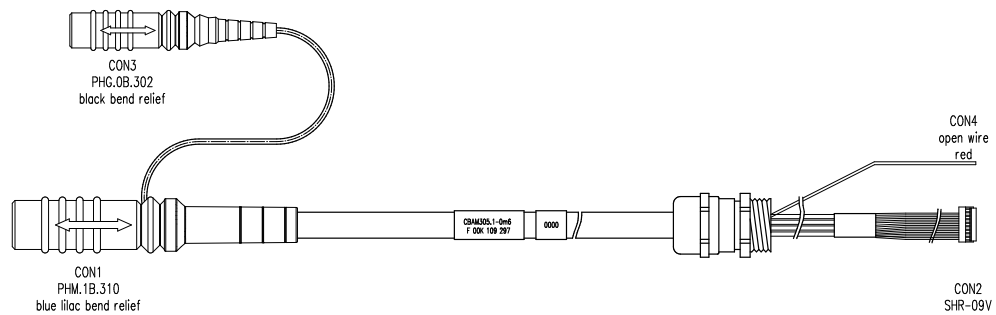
CBAM305.1-0m6 Cable - Dimensions
